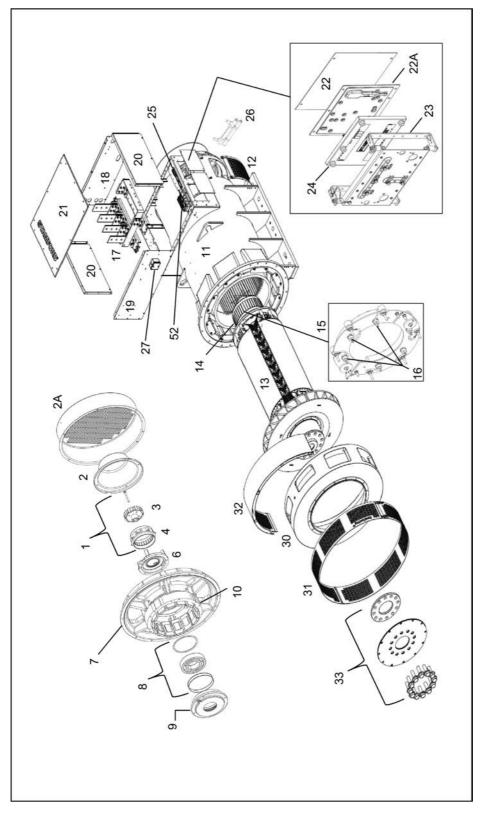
S7 SINGLE BEARING ALTERNATOR
